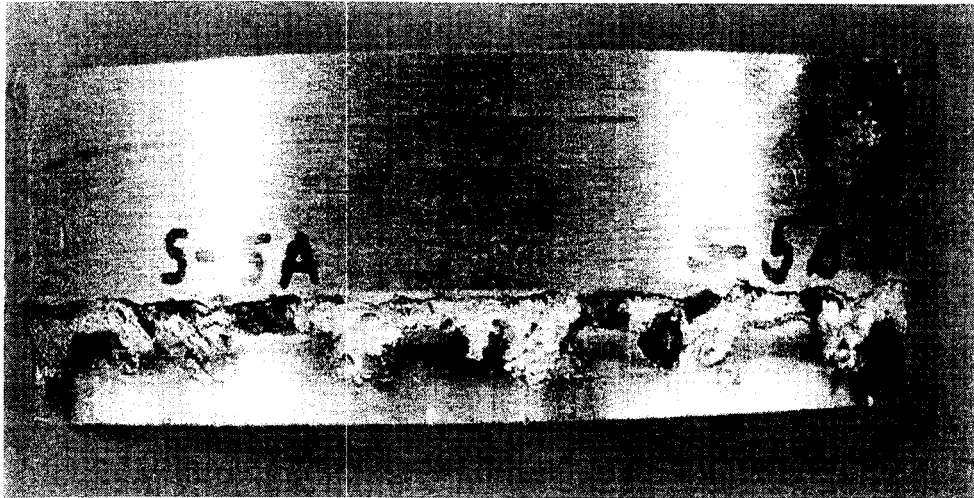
Typical Fatigue Crack that Propagates from Behind the Weld Leg.
